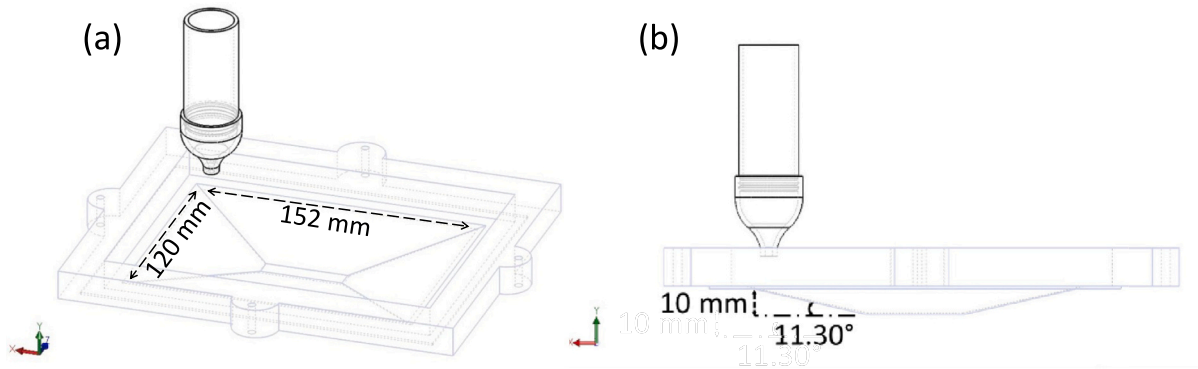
The final Shape geometry a) 3d view, b) Side view.
